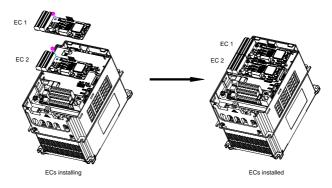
5.5 kW and lower VFD models with expansion cards installed
